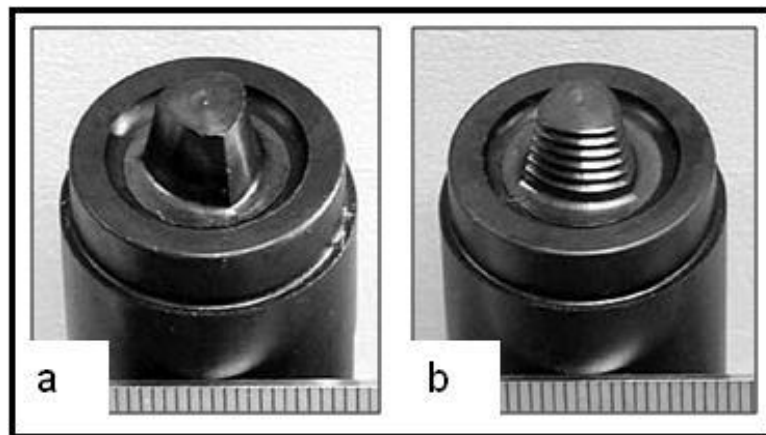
, TriVex Tooling, a) Unthreaded, b) Threaded [112].
